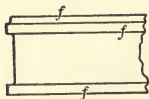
Method of indicating Ordinary "Finish" on a Surface.
